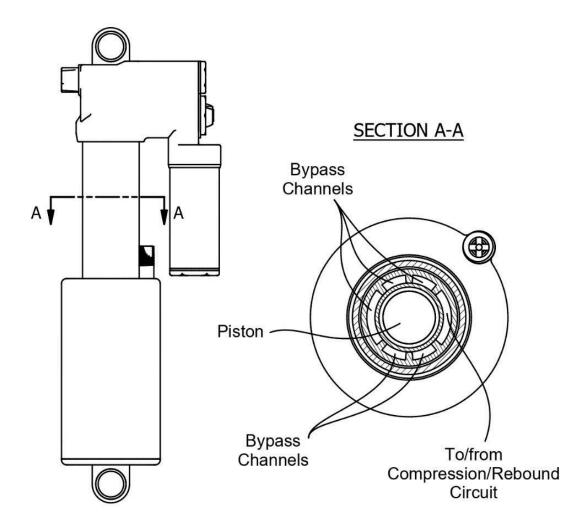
Cross-sectional view of the inner and outer cylinder, exposing the independent bypass channels.
